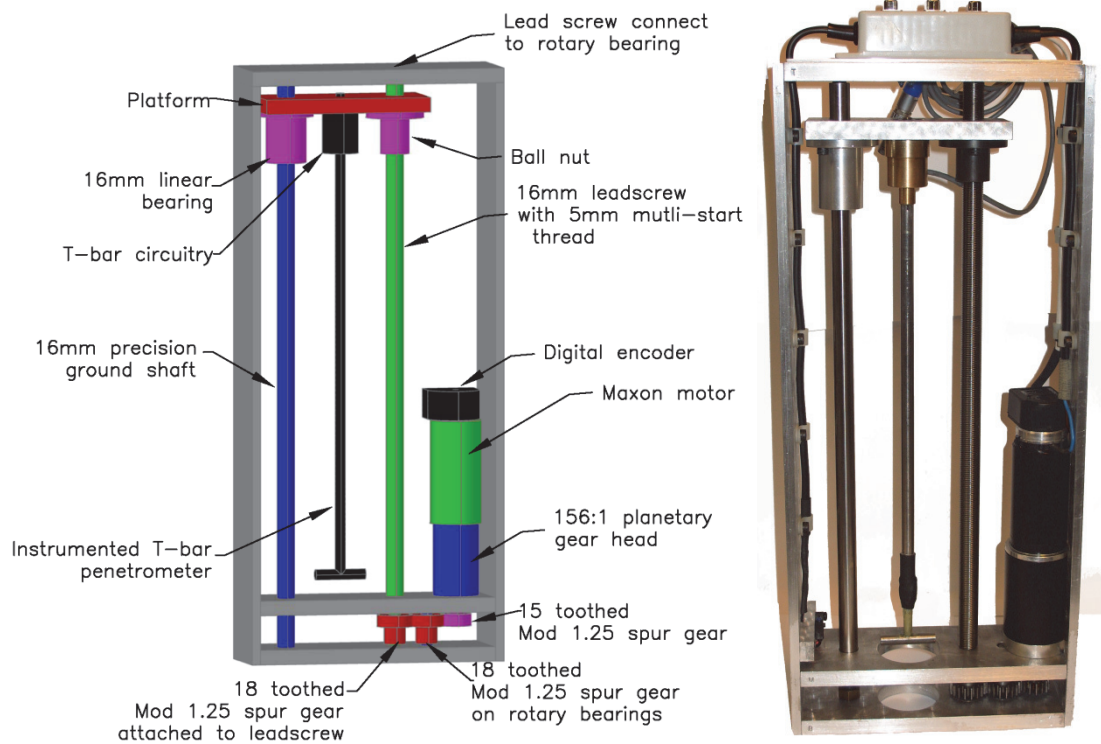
Construction detail and photograph of T-Bar actuator.
